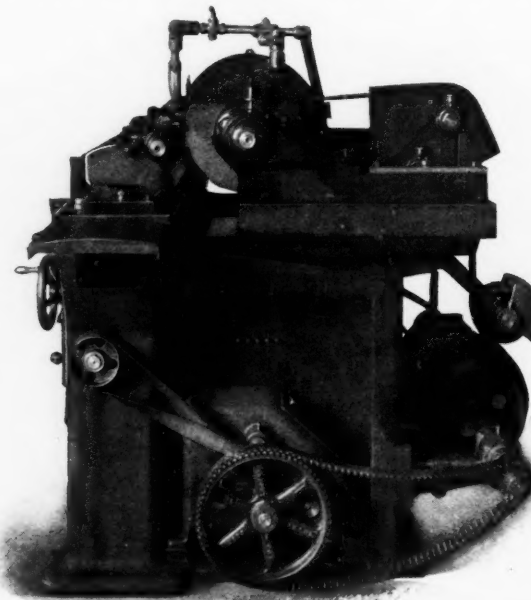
Right-hand End of 8- by 18-inch Grinder, showing Table Drive, Gear-box and Main Drive
